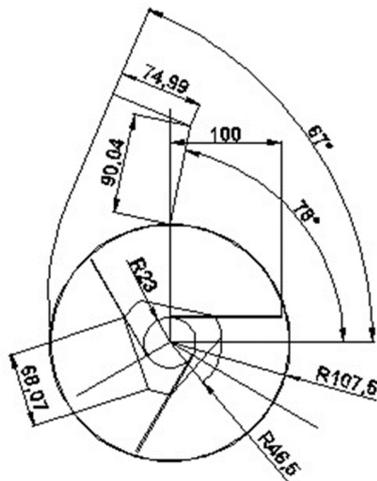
Geometric parameters of the throwing machine rotor (all measurements are in mm)
